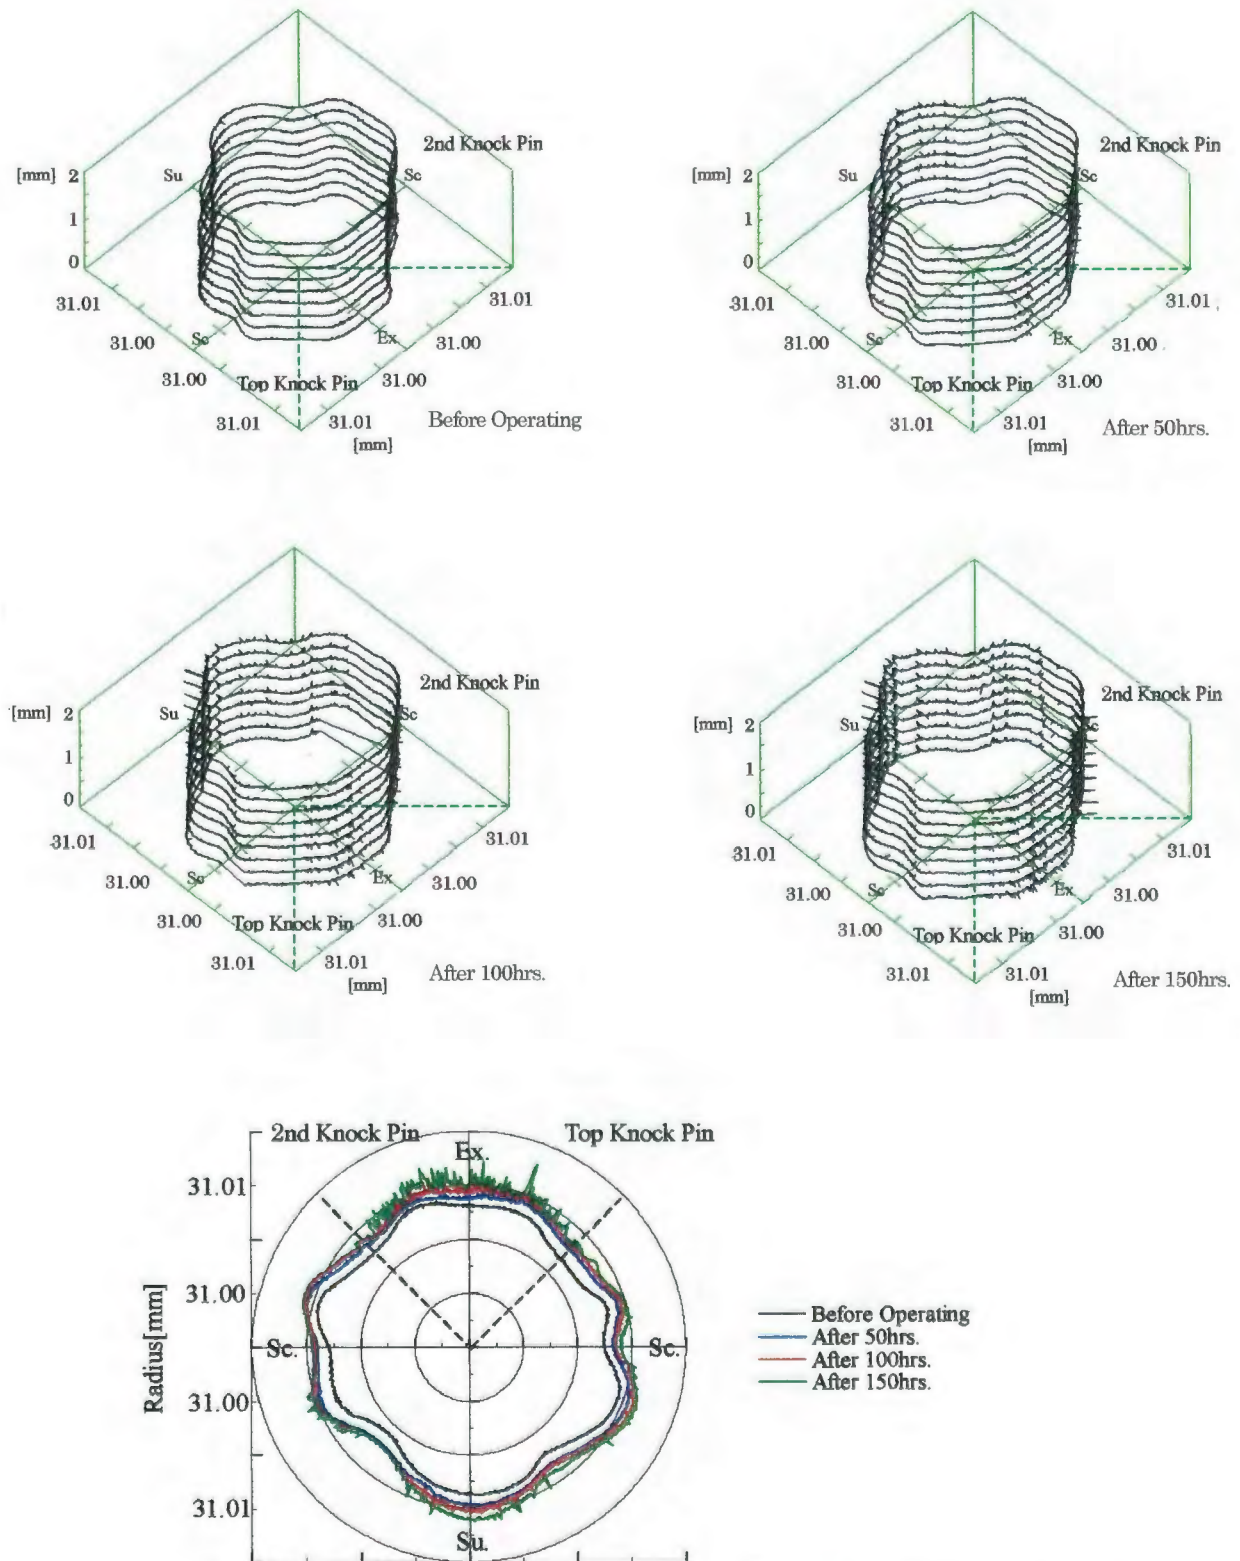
(f) The three dimensional and plane form of cylinder M1(RND6)
